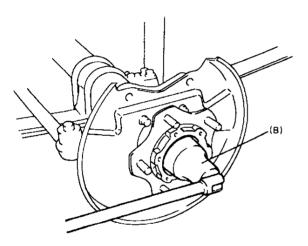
Special Tool (B) (Front Wheel Bearing Nut Socket Wrench 09941-58010)
